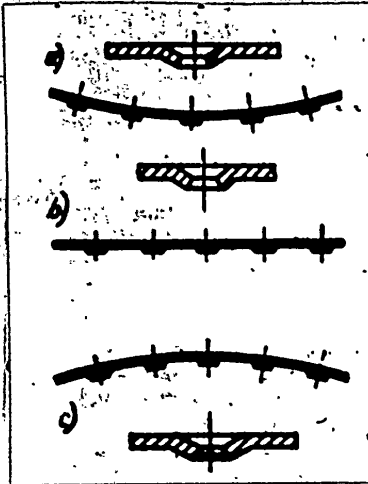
Determination of Correct Spring Pressure in Tools Used for Dimpling by Visual Inspection of Recesses Made in Test Specimens
